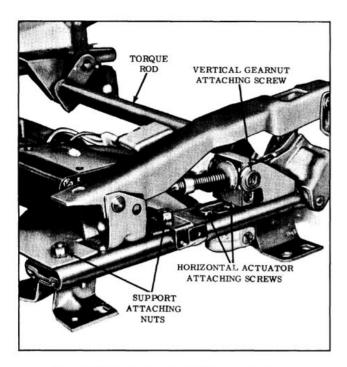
Bucket Seat Adjuster (Outboard)
